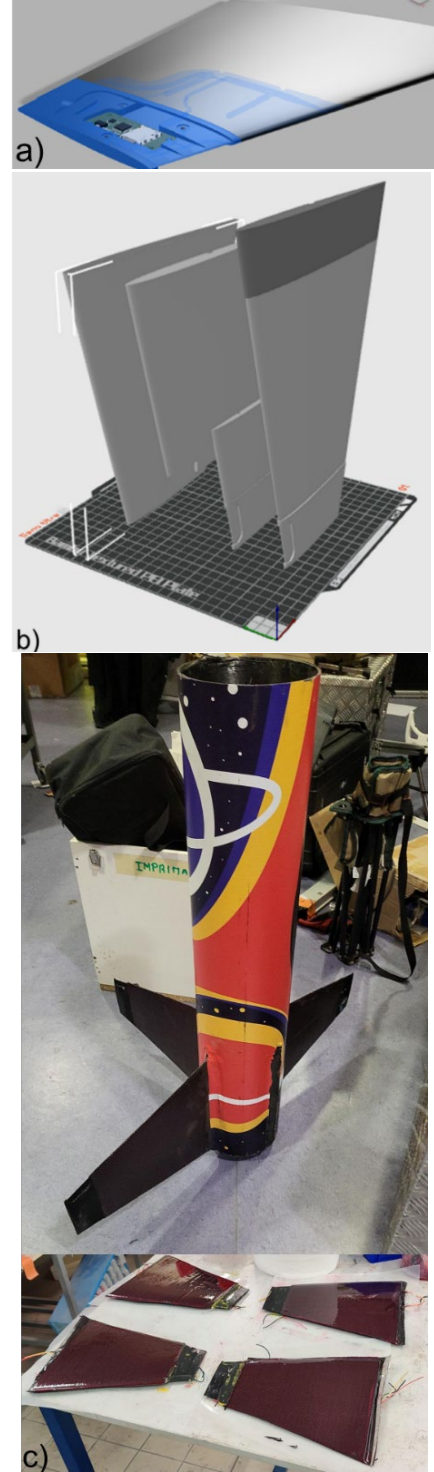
Representation of 3D-printed Fins: a) 3D model with the sensor for vibrational measurement, b) 3D model in 3D-printer software, and c) 3D printed parts.
